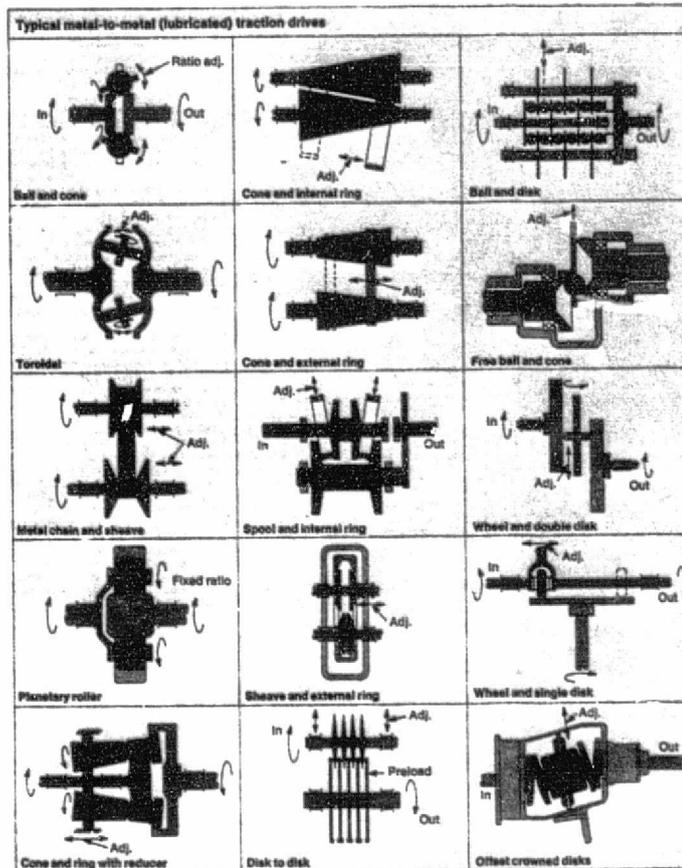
Typical industrial traction drive geometries. (Courtesy of Design Engineering (ref. 18).)
